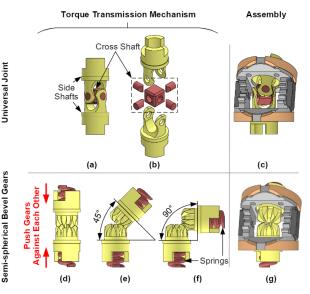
Torque transmission mechanisms. (a) Universal joint assembly; (b)exploded view of (a); (c) joint assembly with a universal joint $(\theta=30^\circ)$;(d)-(f) semi-spherical bevel gears when joint angle $\theta=0^\circ$, 45°, and 90°, respectively; (g) joint assembly with semi-spherical bevel gears.
